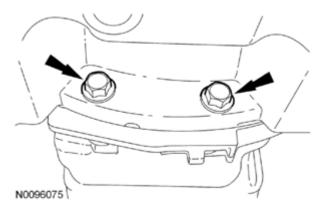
Locating Bellhousing-To-Oil Pan Bolts Courtesy of FORD MOTOR CO.
